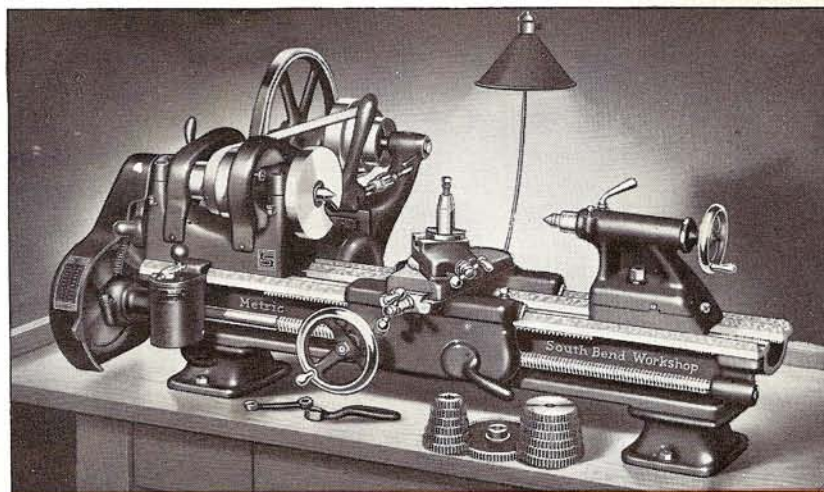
Cat. No. 40415-YA. 9"x3' "Workshop" Precision Bench Lathe and Adjustable Motor Drive, with full Metric equipment for cutting metric threads, but less bench.....\$117.00
